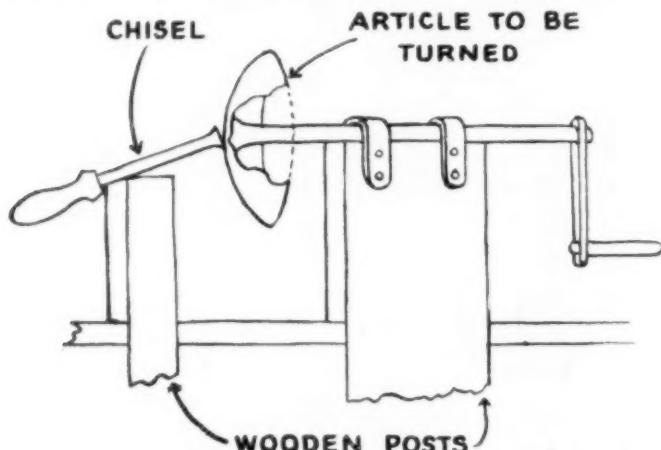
A HAND-POWER CHINESE METAL LATHE
